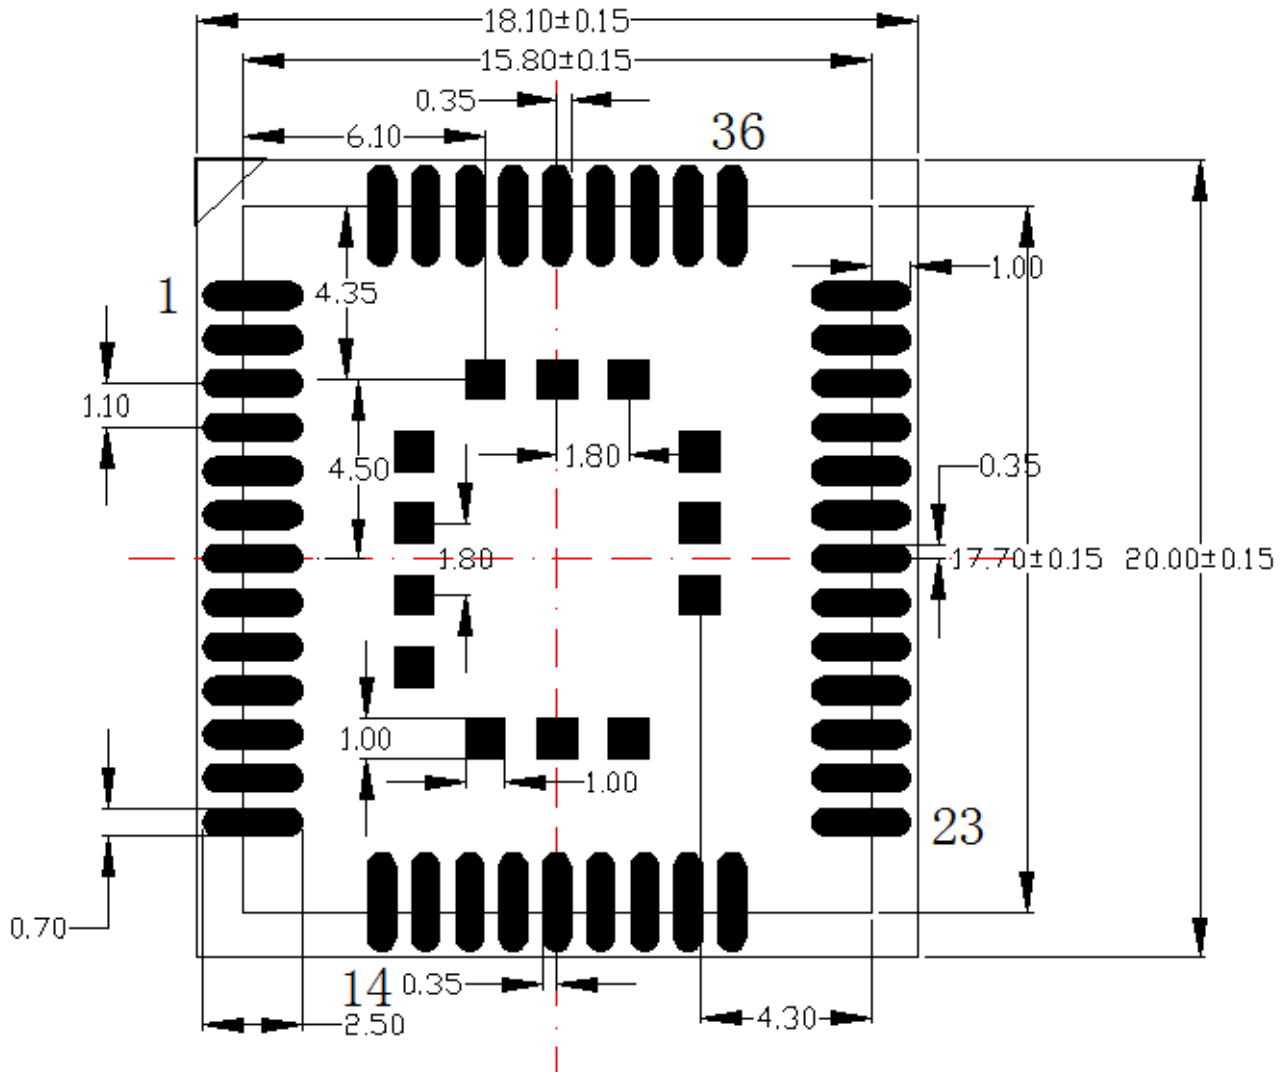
Recommended Stencil Design for BC68 (Unit: mm)
